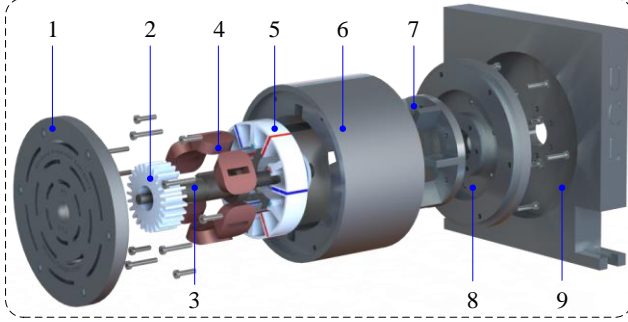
The exploded view of the proposed motor. (1) End cap. (2) Rotor. (3) Shaft. (4) Coils. (5) Stator. (6) House shell. (7) Leveler. (8) End cap. (9) Stand.
